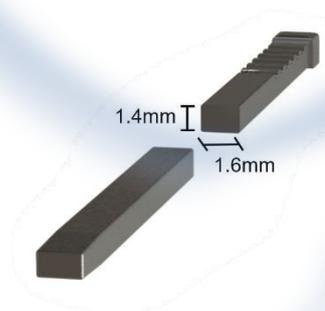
Rectangular pin detail – minimum dimension 1.4mm
